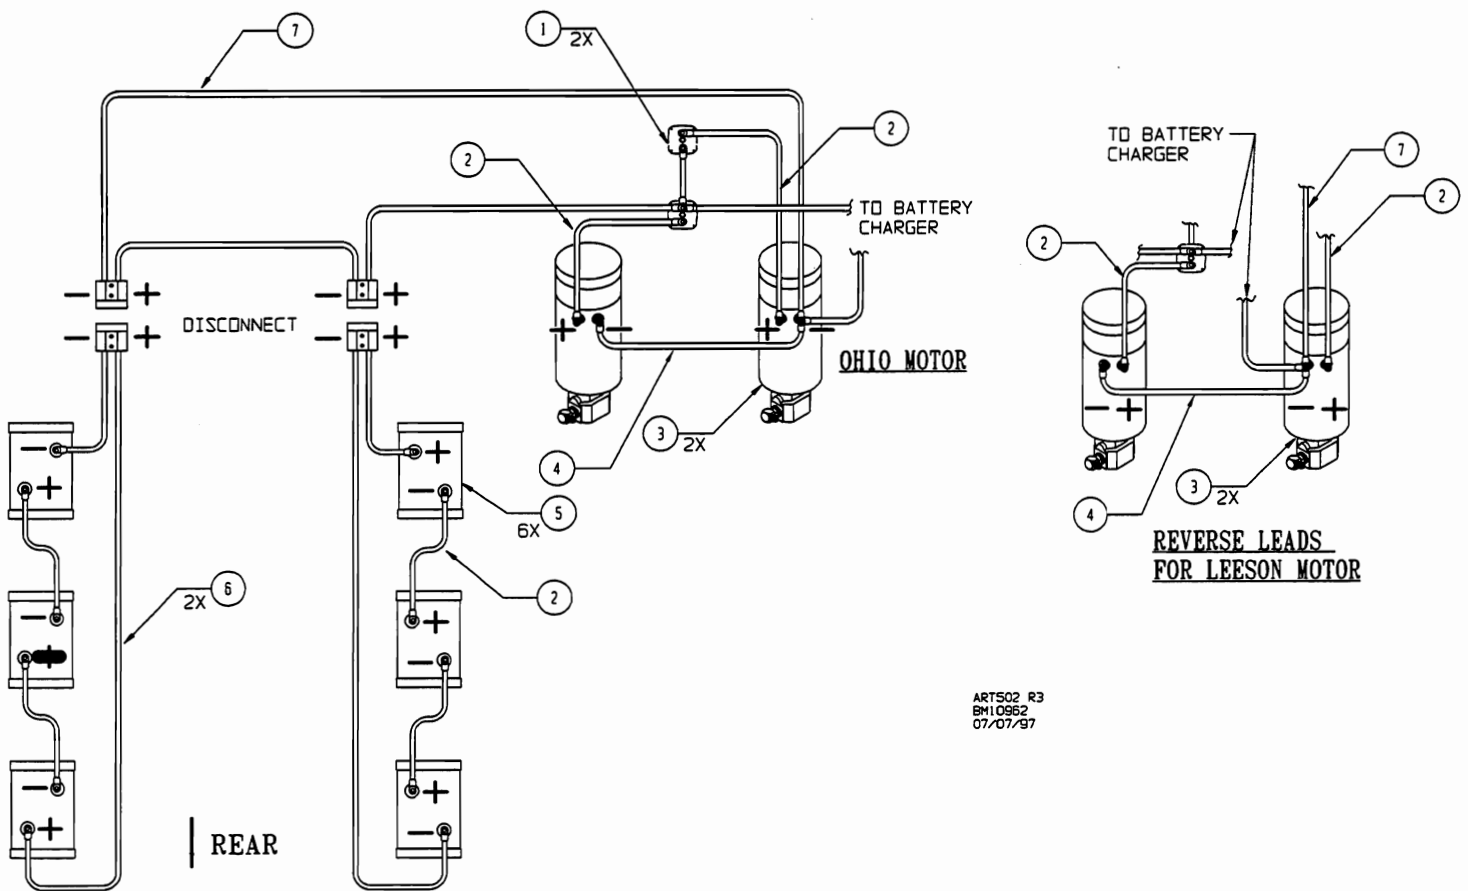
High Torque Series Battery & Motor Cable Layout
